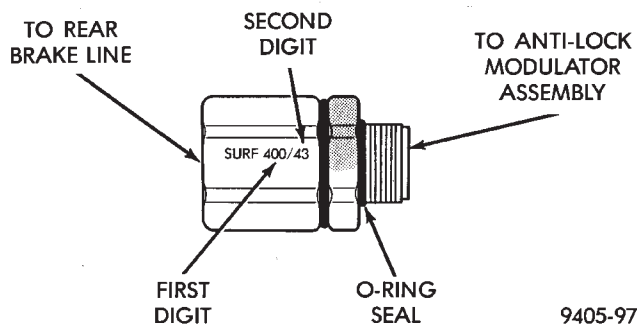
Rear Brake Proportioning Valve Location On Modulator Assembly
